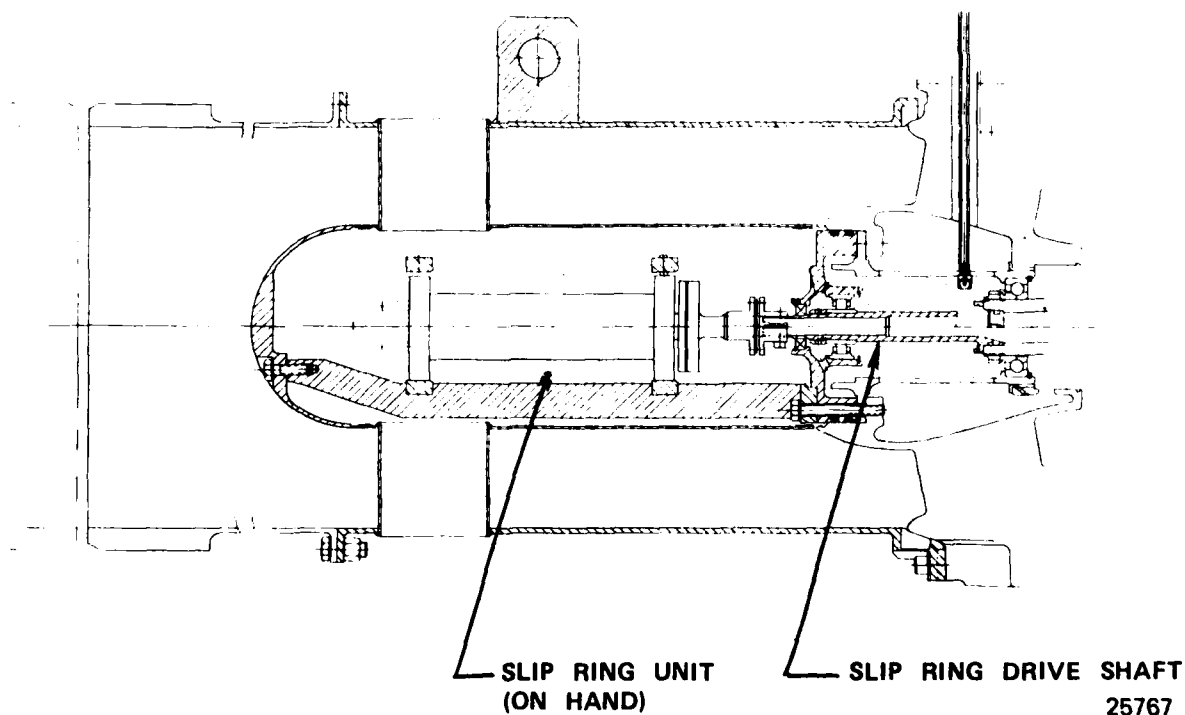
Gasifier Compressor Rig Slip Ring Design.
